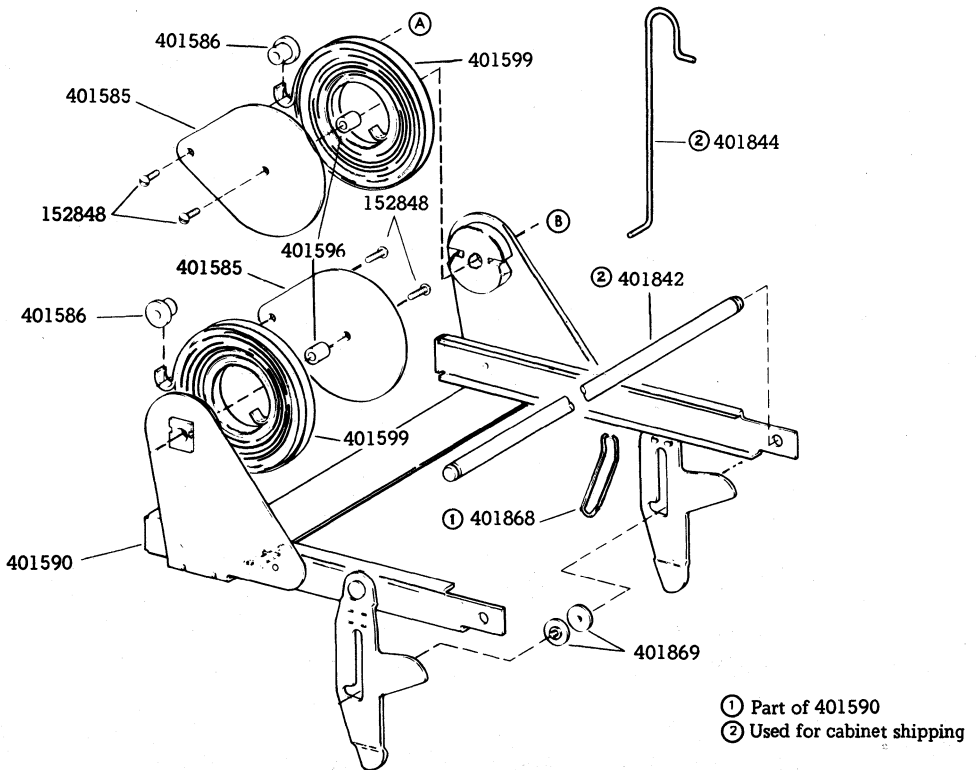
Early Design Printer Mounting Cradle for Adjacent or RO Friction Feed Printer
